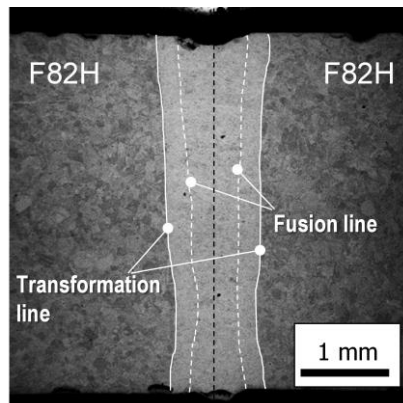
Cross-sectional microstructure of F82H/F82H welded by 4kW fiber-laser welding.
